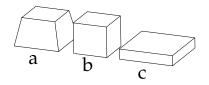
This is a kind of whittling project. The best tool for shaping these parts is a hack saw blade just held in the hand. Sand paper works well too. A fine toothed band saw works well, too. The parts can be glued together using rubber cement. Apply thin layer of glue to both surfaces to be attached and let glue thoroughly dry.
